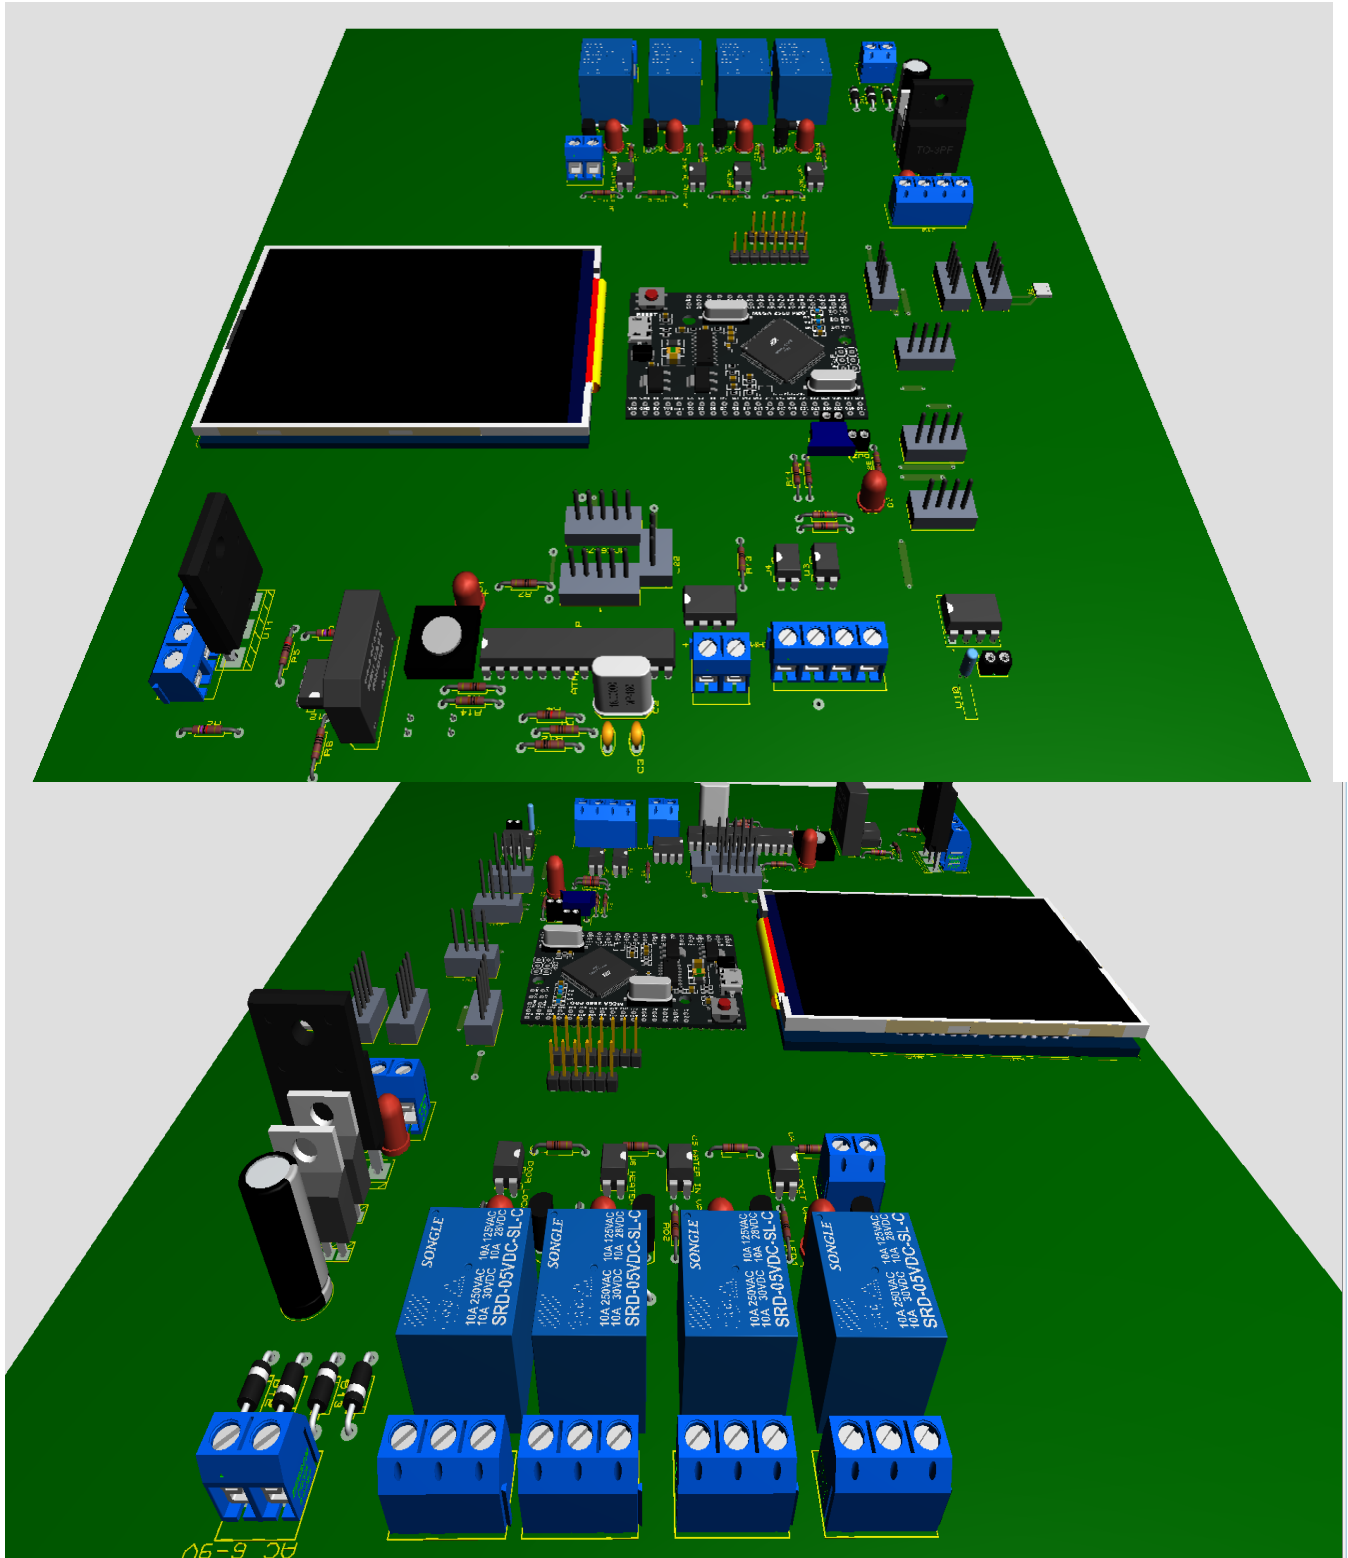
3D view of the complete PCB design of the smart steam sterilizer control unit: front view (left) and rear view (right).
